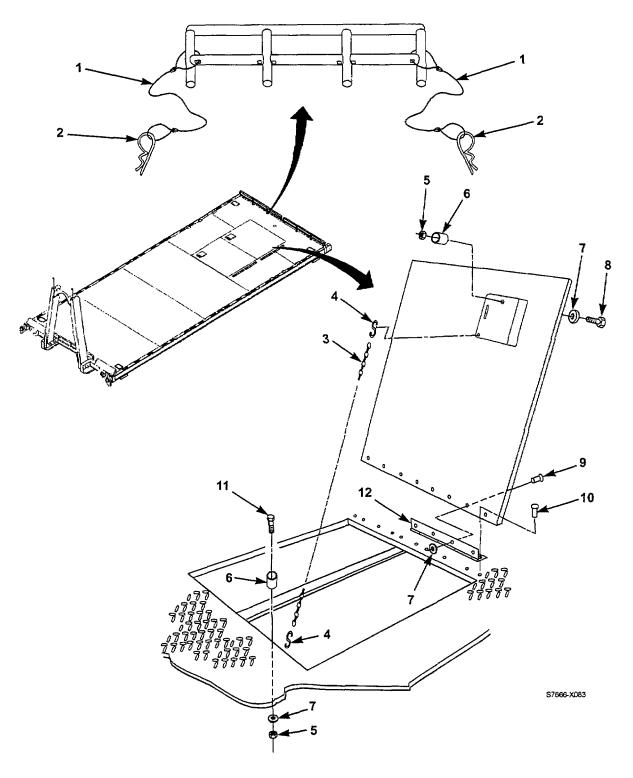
REAR BLOCKER ASSEMBLY AND STOWAGE DOOR COMPONENTS
